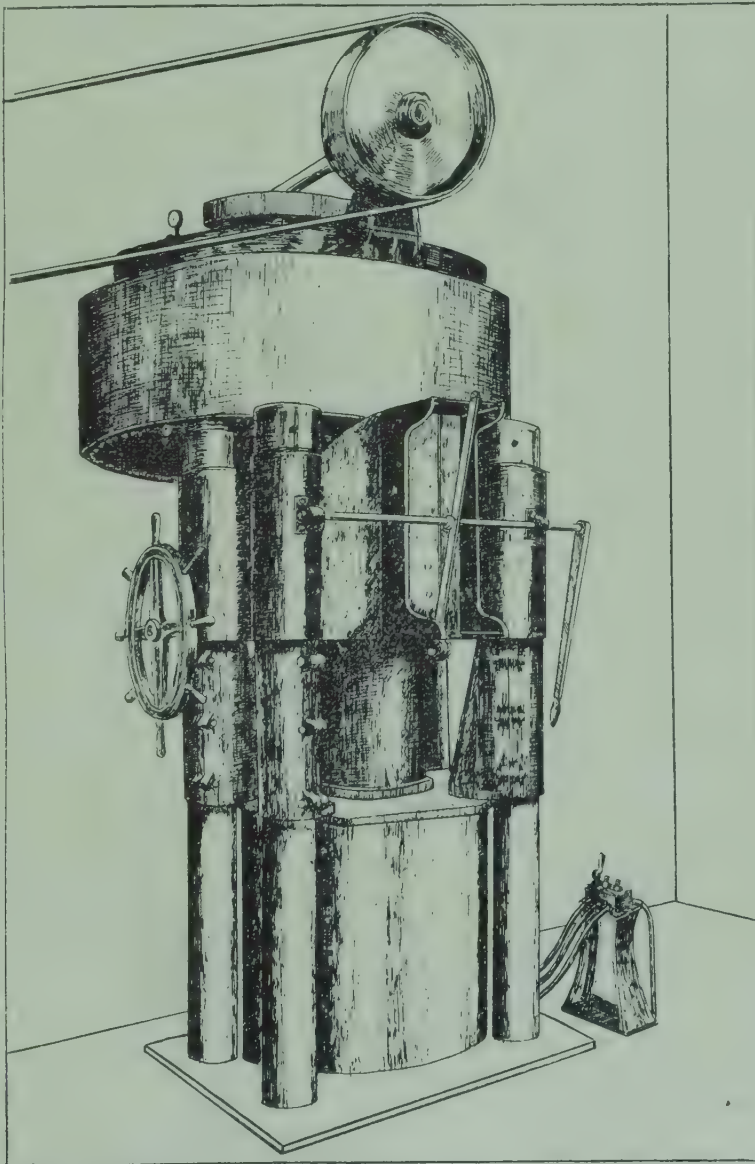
One of the largest types of Cage Press showing cooker mounted on top of the head
